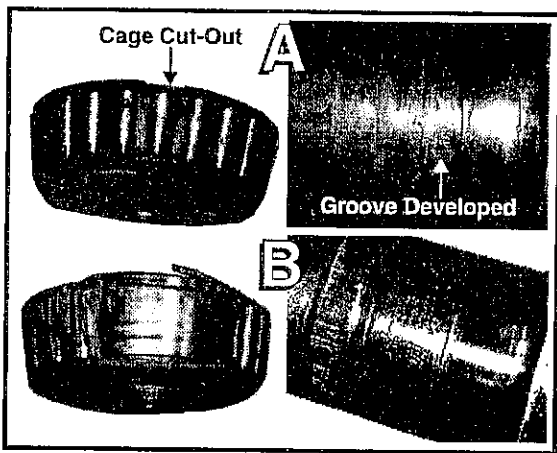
&b. Test Inboard Cone Assembly and Axle Conditions
